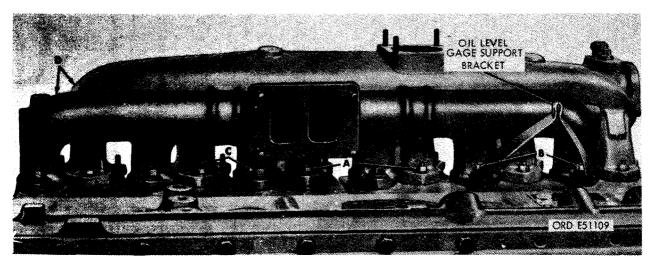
REMOVING OR INSTALLING INTAKE AND EXHAUST MANIFOLDS AS A UNIT.
